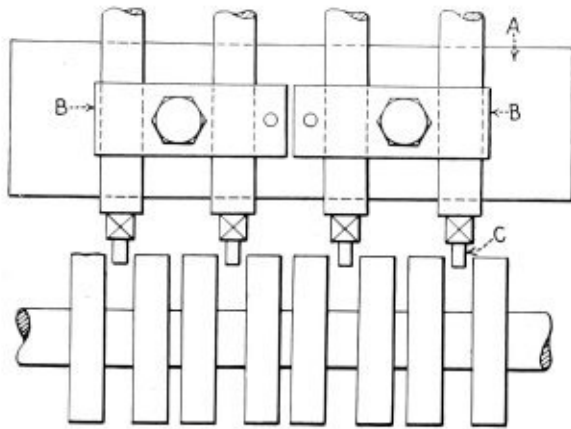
A fixture for milling the square ends on four staybolts at one set-up
